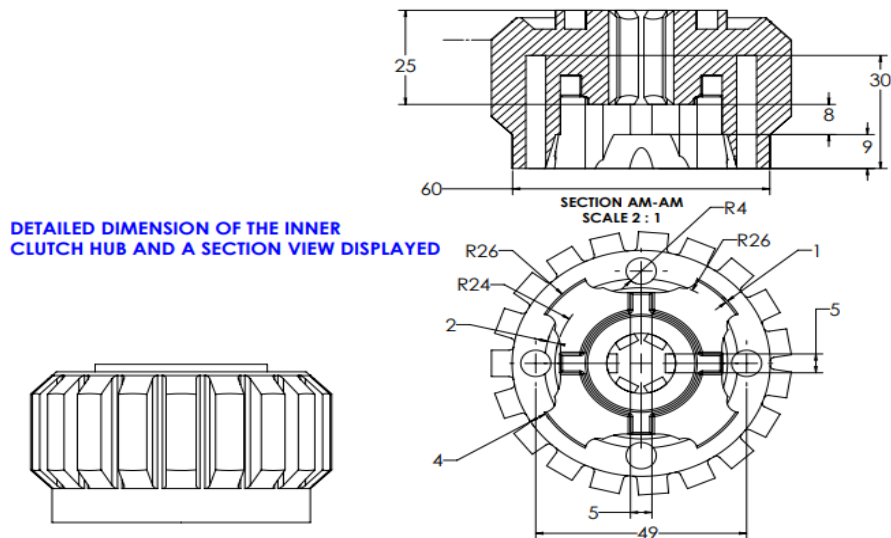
Detailed Dimensions of the inner clutch hub and a section
